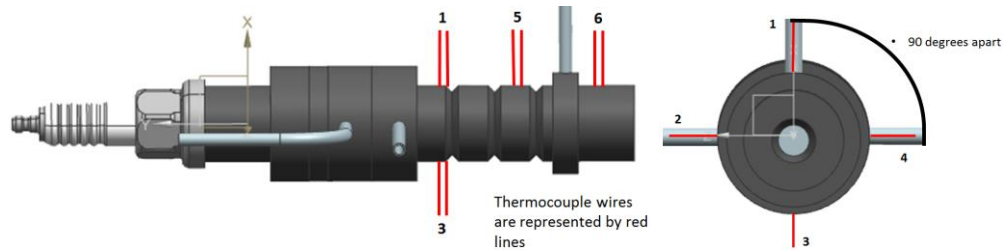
Thermocouple locations on the engine chamber and nozzle
